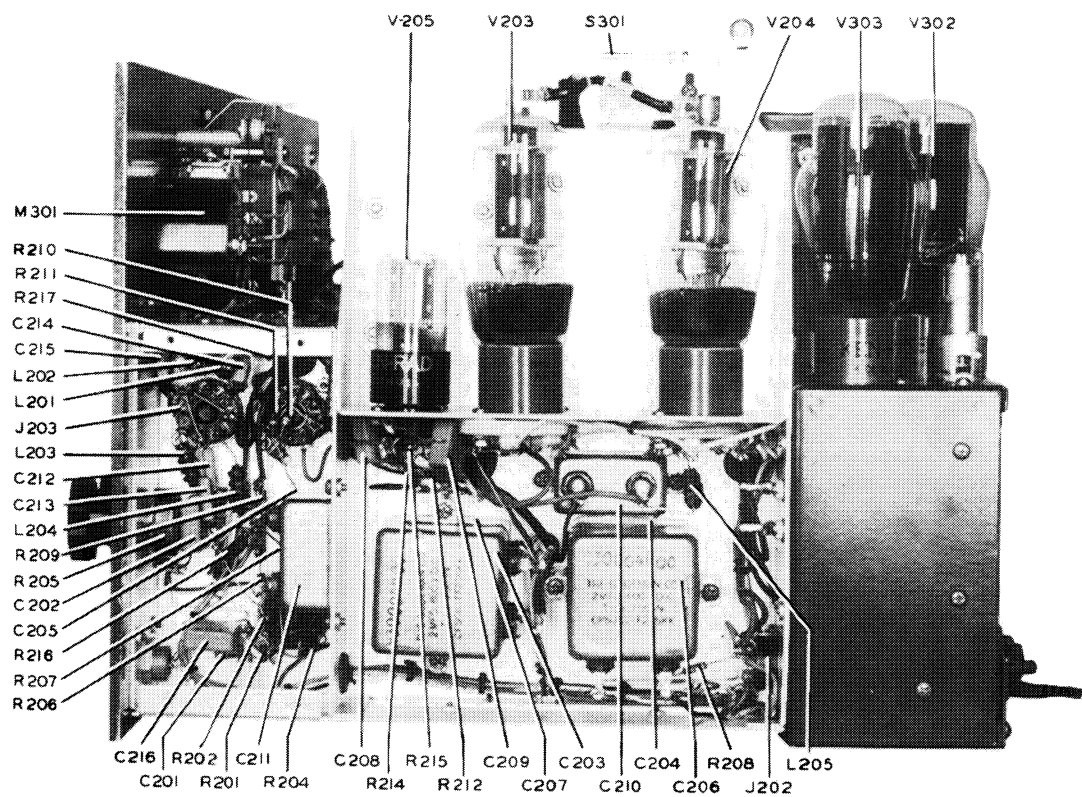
32V-2 PARTS ARRANGEMENT - RIGHT SIDE OPEN
